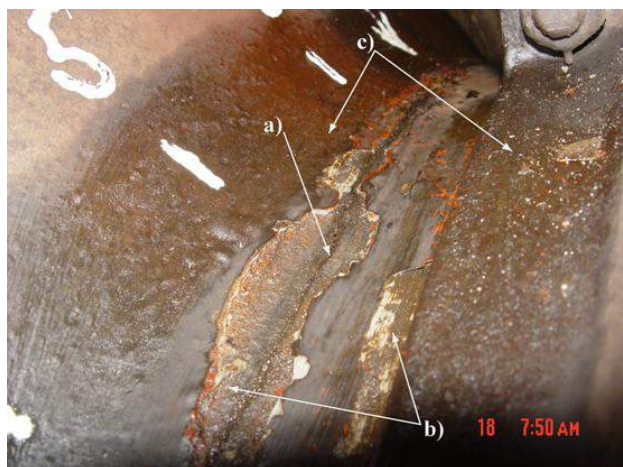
Close view of the transient flange radius after detecting the crack
